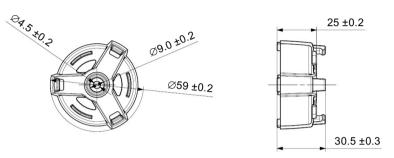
Dimension drawing of spacer 6GT2690-0AL00
